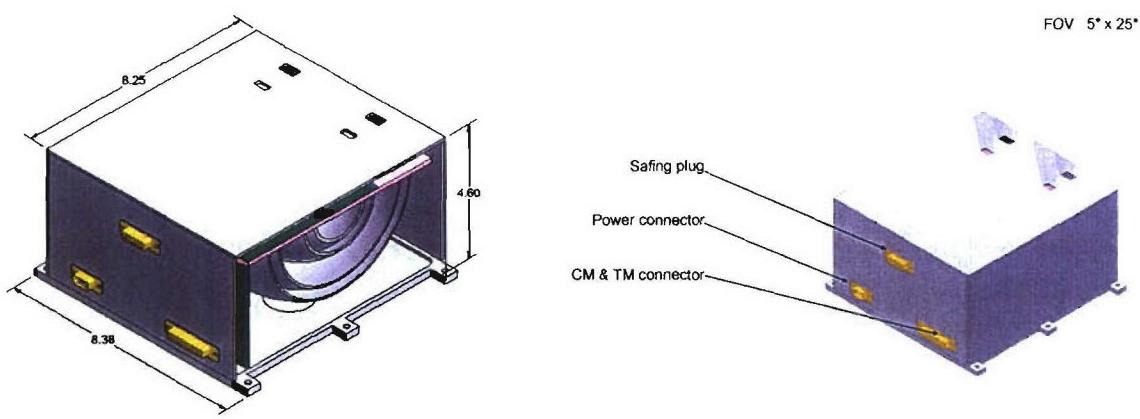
Drawings of the preliminary packaging design. Left: Illustration showing location of sensor assembly and boards, with one side removed. Also shows dimensions and mounting feet. Right: Illustrating showing preliminary fields of view and connectors.
